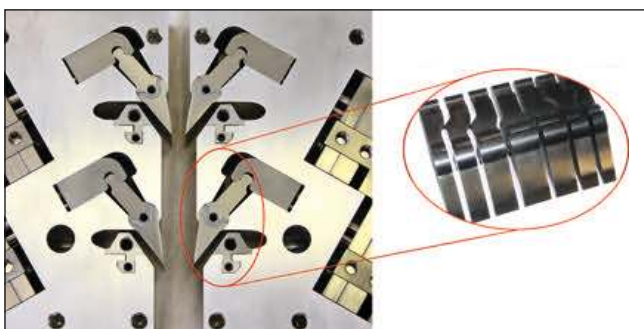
The Reicofeed 2.1 coextrusion feed block has segmented profilers for optimizing the individual layer thickness tolerances (figure: Reifenhäuser CSC)
